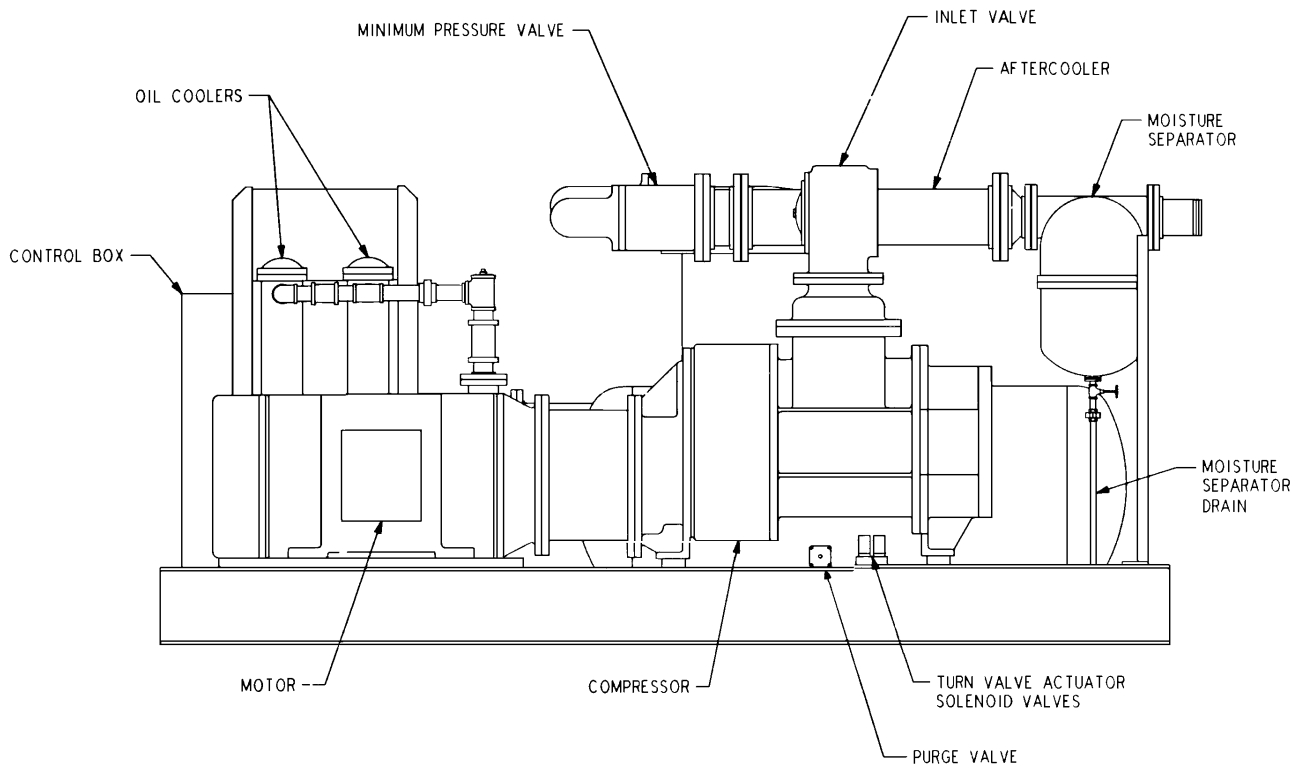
VIEW OF WATER COOLED UNIT WITH AFTERCOOLER (LESS ENCLOSURE) COMPRESSOR – MOTOR SIDE
